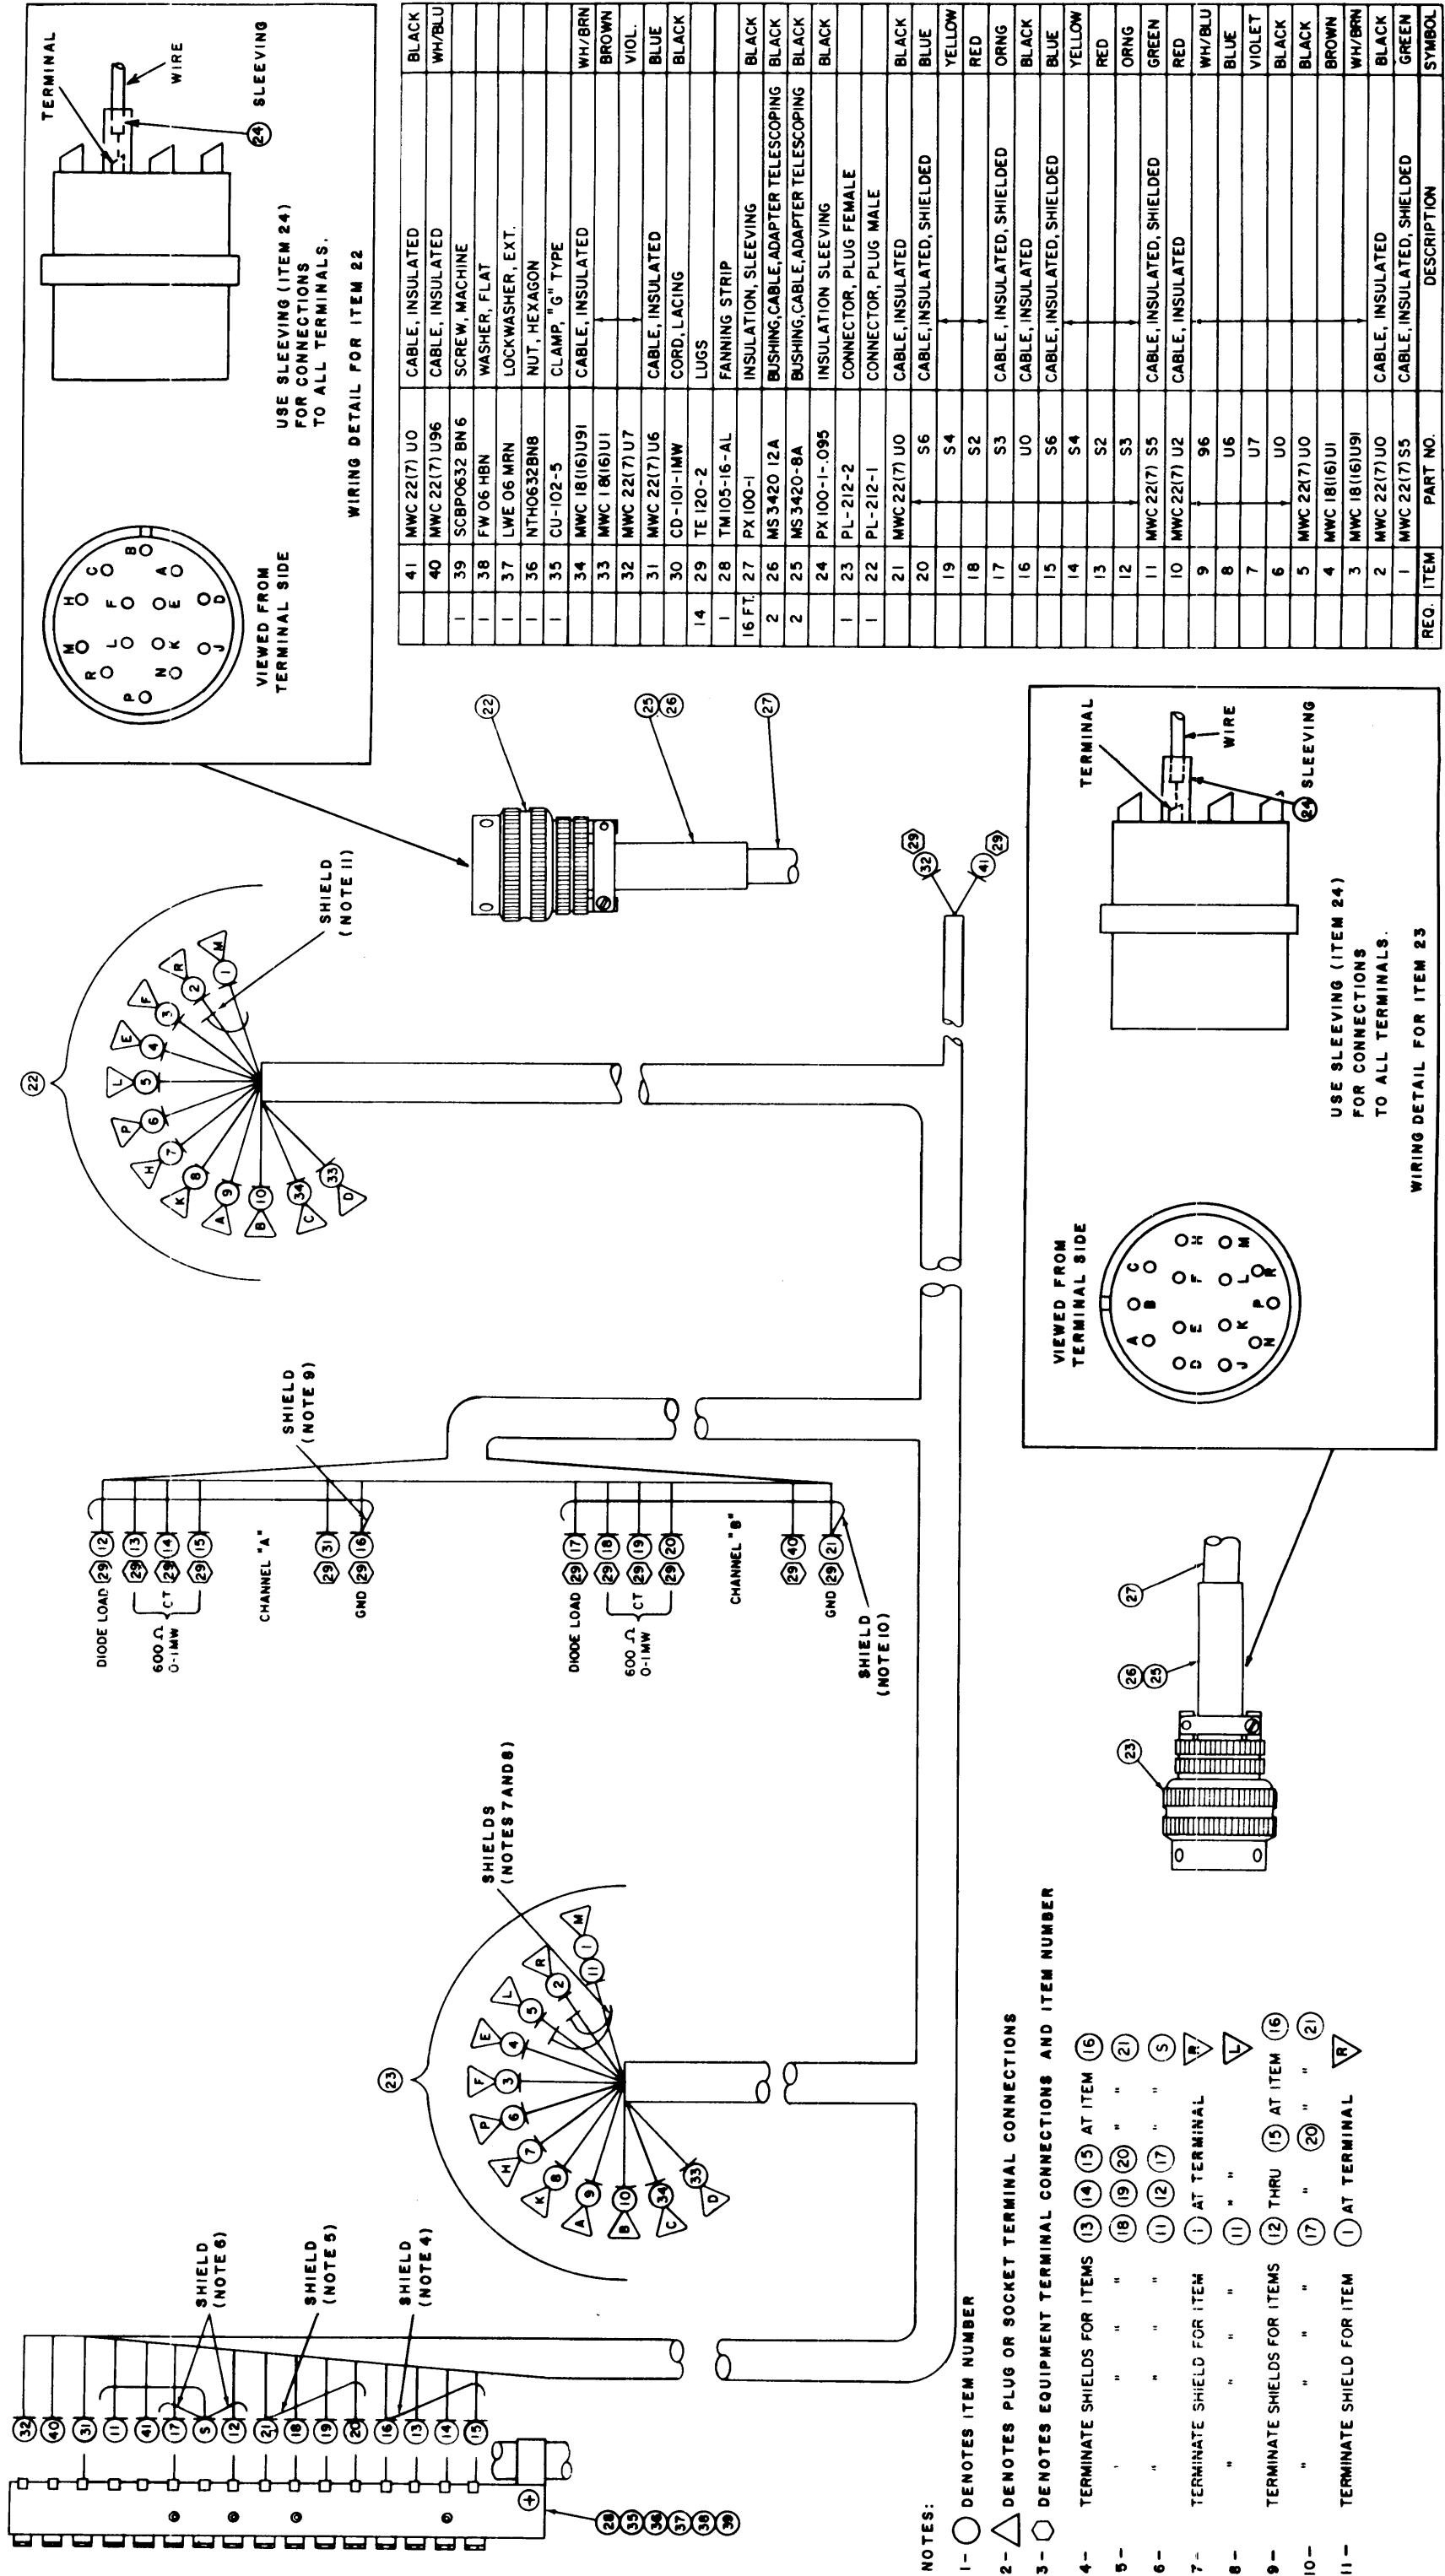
Cable Assemblies CA686-1, CA-687-1, and CA-687-2
